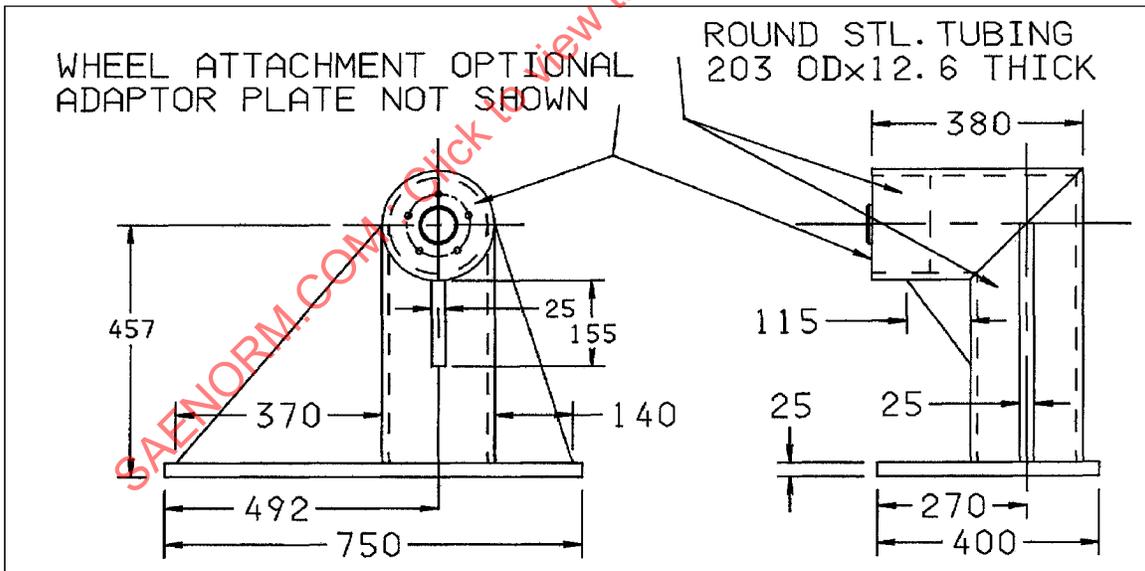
SAE J1981 WHEEL HOLDING FIXTURE
